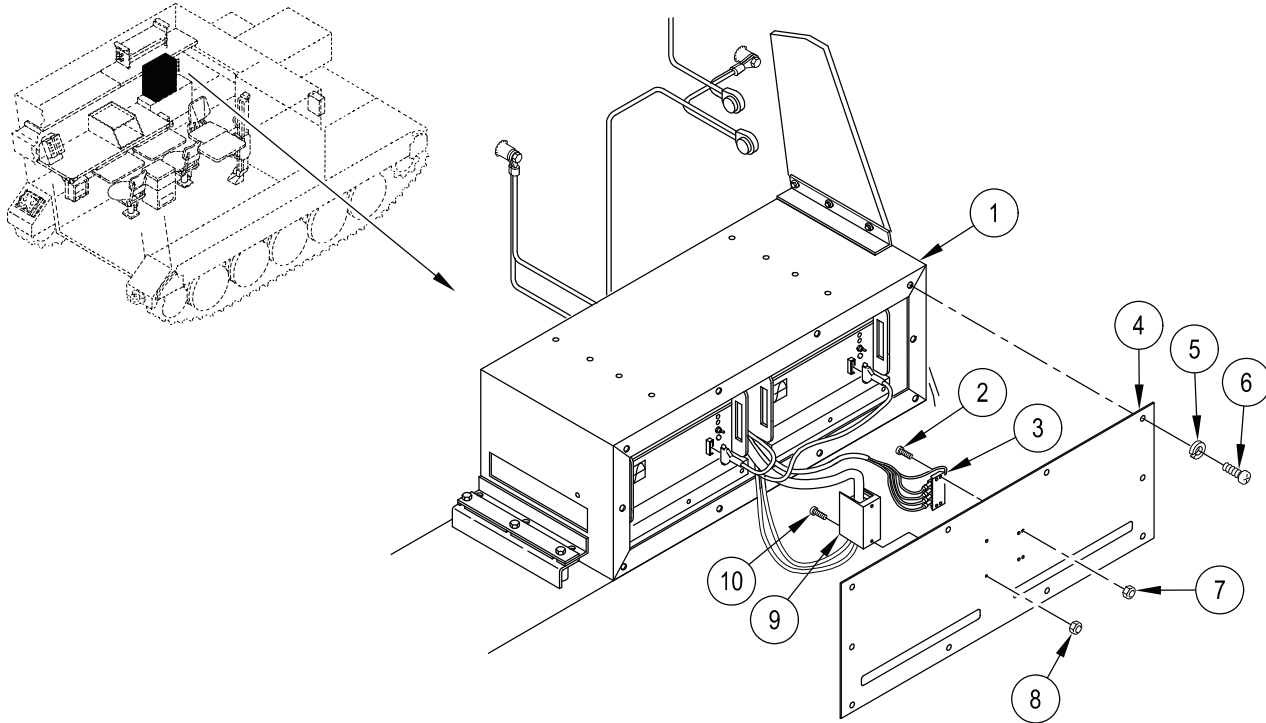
Inverter Housing Access Cover/Terminal Block Removal
